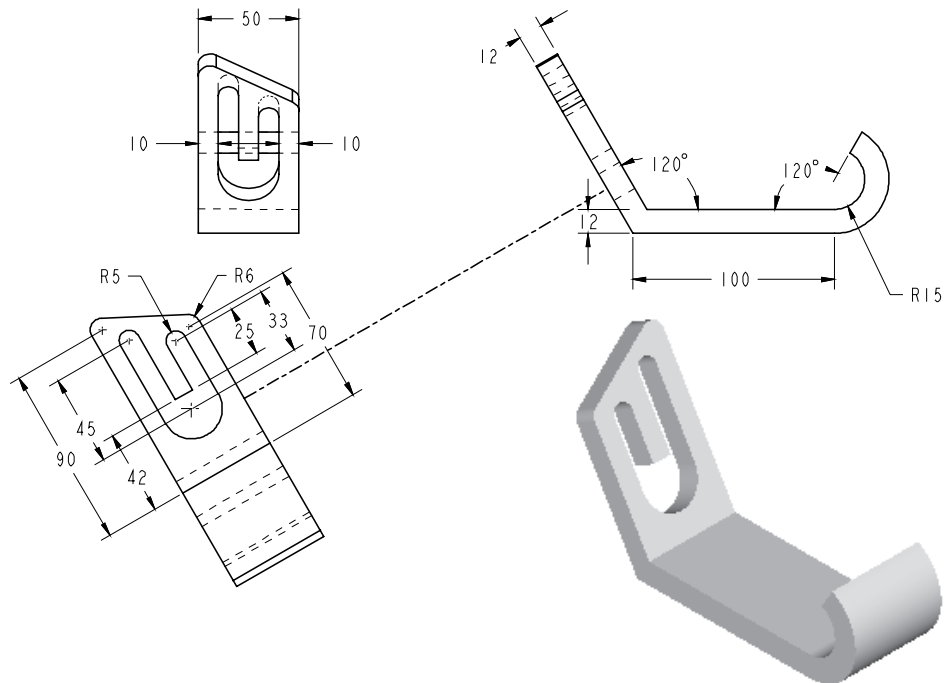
Left-side view, auxiliary view, front view, and isometric view of the model
